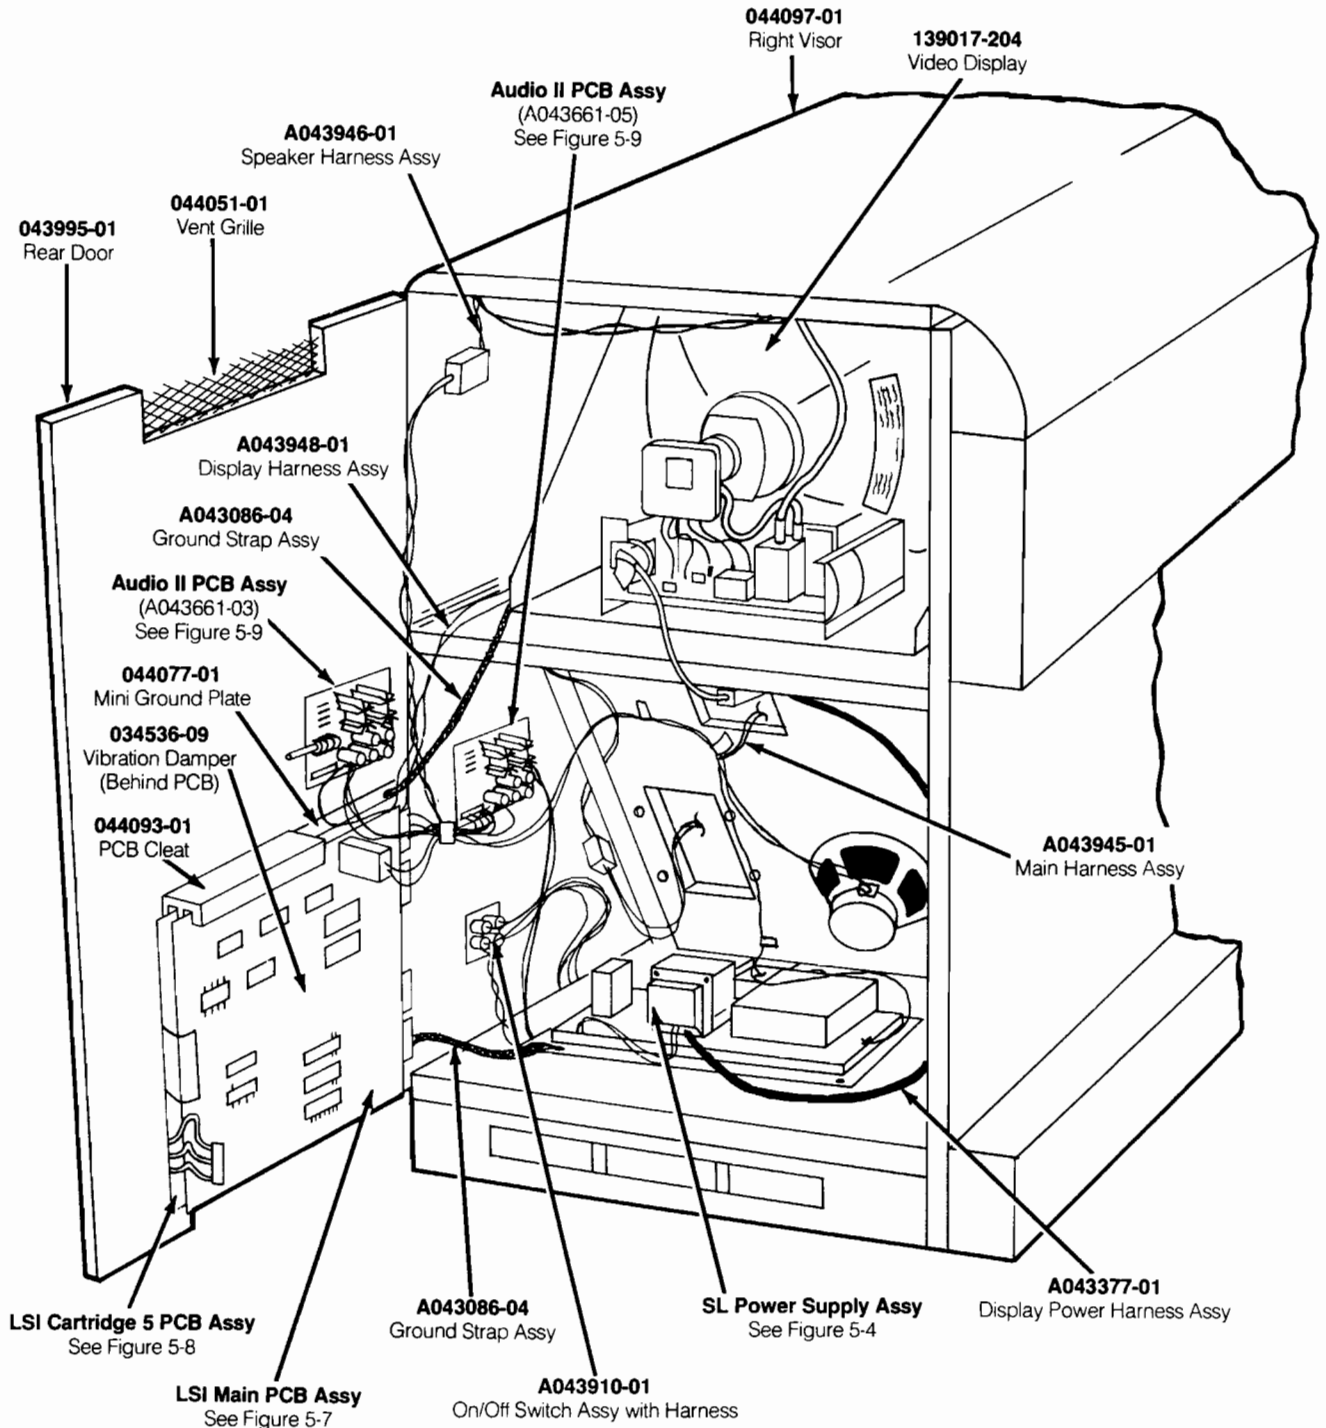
Cabinet-Mounted Assemblies, Continued
